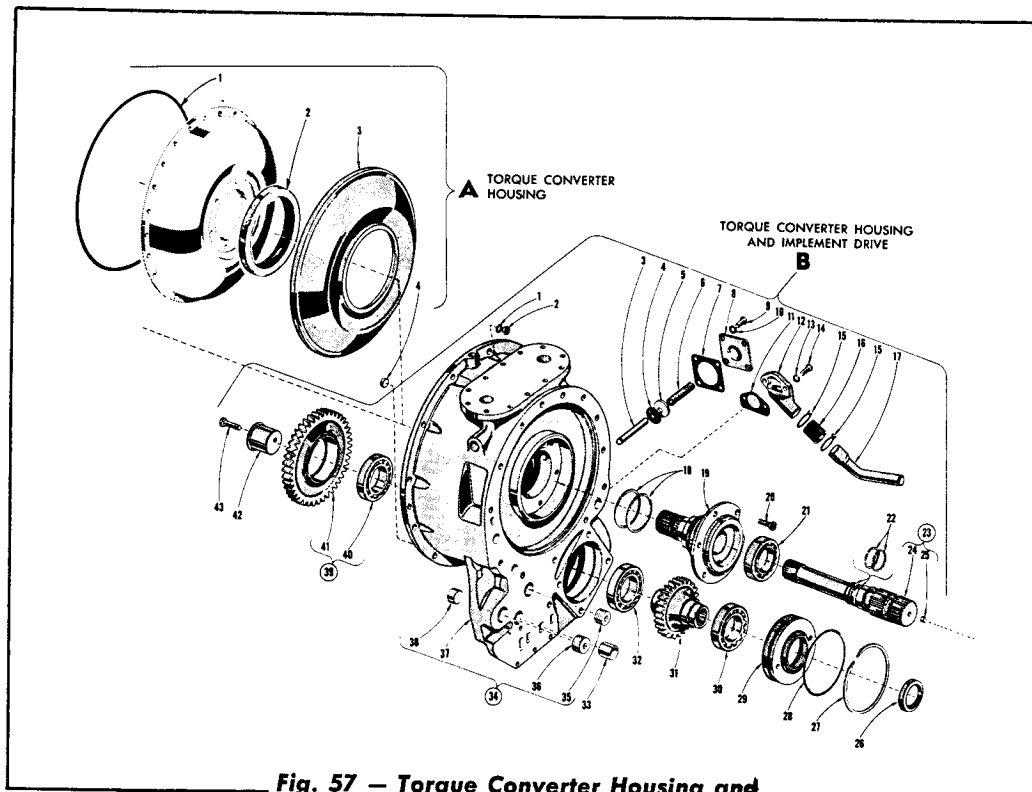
Torque Converter Housing and Implement Drive Assembly — Legend
